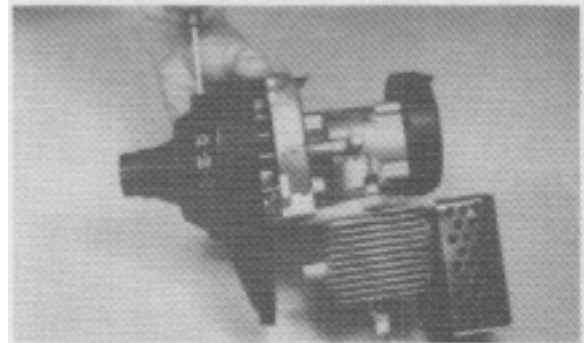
Pull slowly on starter rope to engage starter dogs, then install the starter housing mounting screws (ref. Fig. 27).
